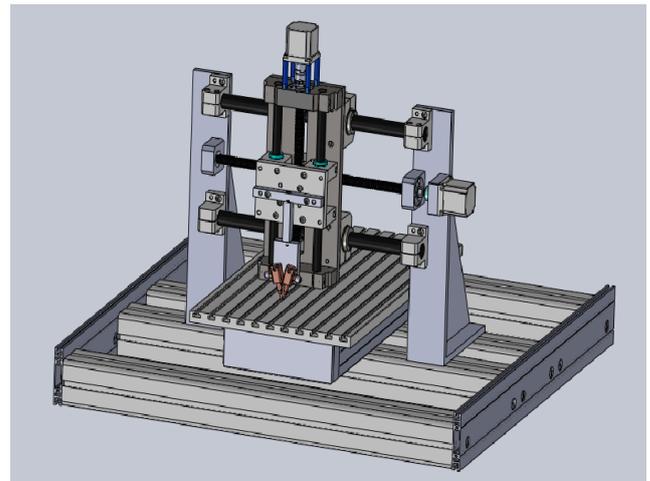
Equipment with compact dimension with a small frame that can be mounted on a workbench, 3D model.
